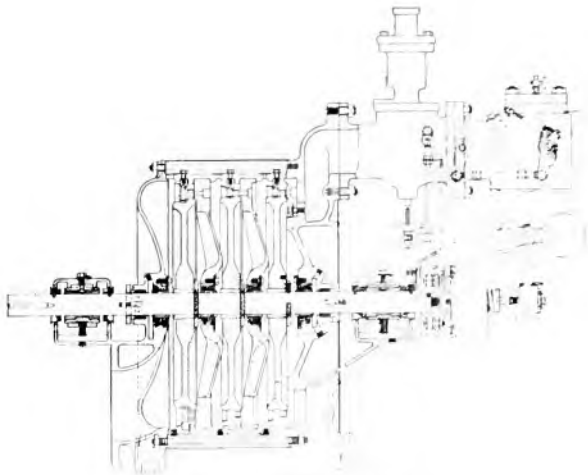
Cross-section Drawing of a Mechanical Drive Turbine
